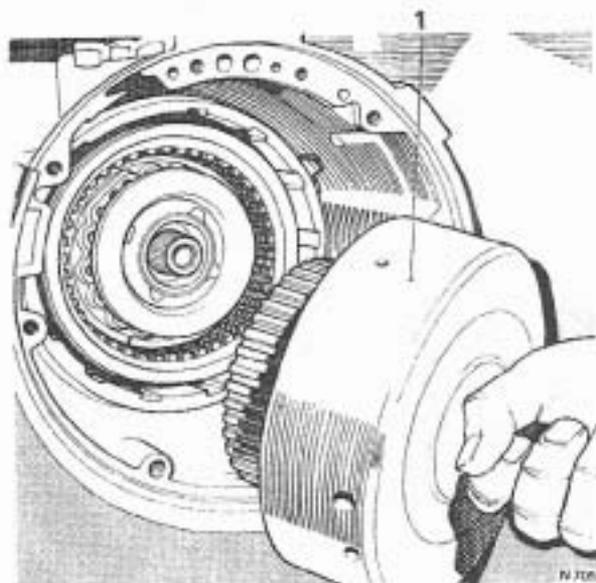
REMOVING THE FORWARD CLUTCH ASSEMBLY
